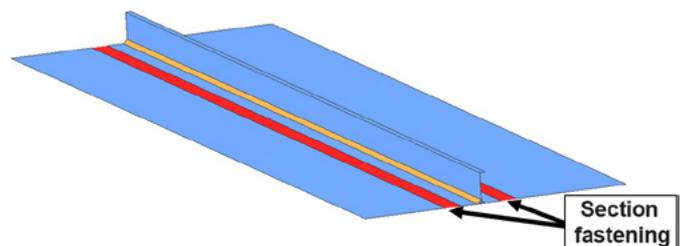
Variant “1” of the fastening – section pressed against the welding table along the weld (areas marked red)
